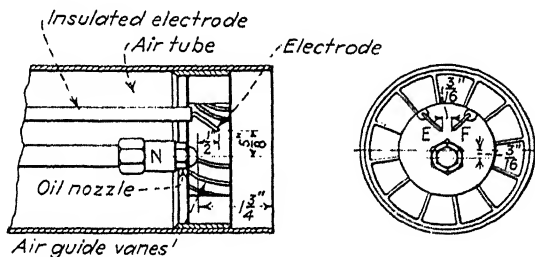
Air tube and ignition electrodes of typical pressure-operated oil burner.
